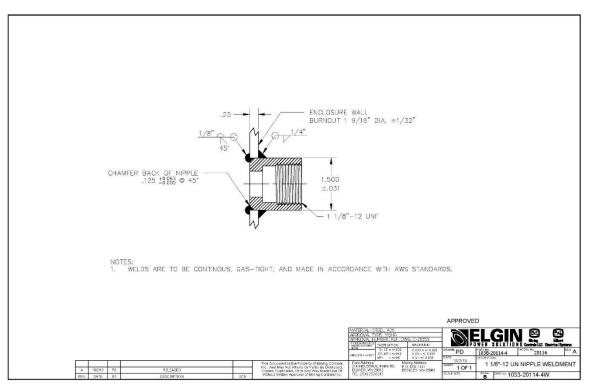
XP Enclosure Application OEM Weld-in Gland Nipple Drawing
